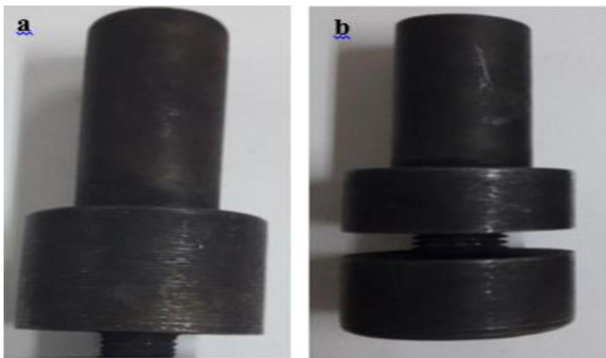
FSW tools used in this work: (a) Conventional tool and (b) Bobbin tool
